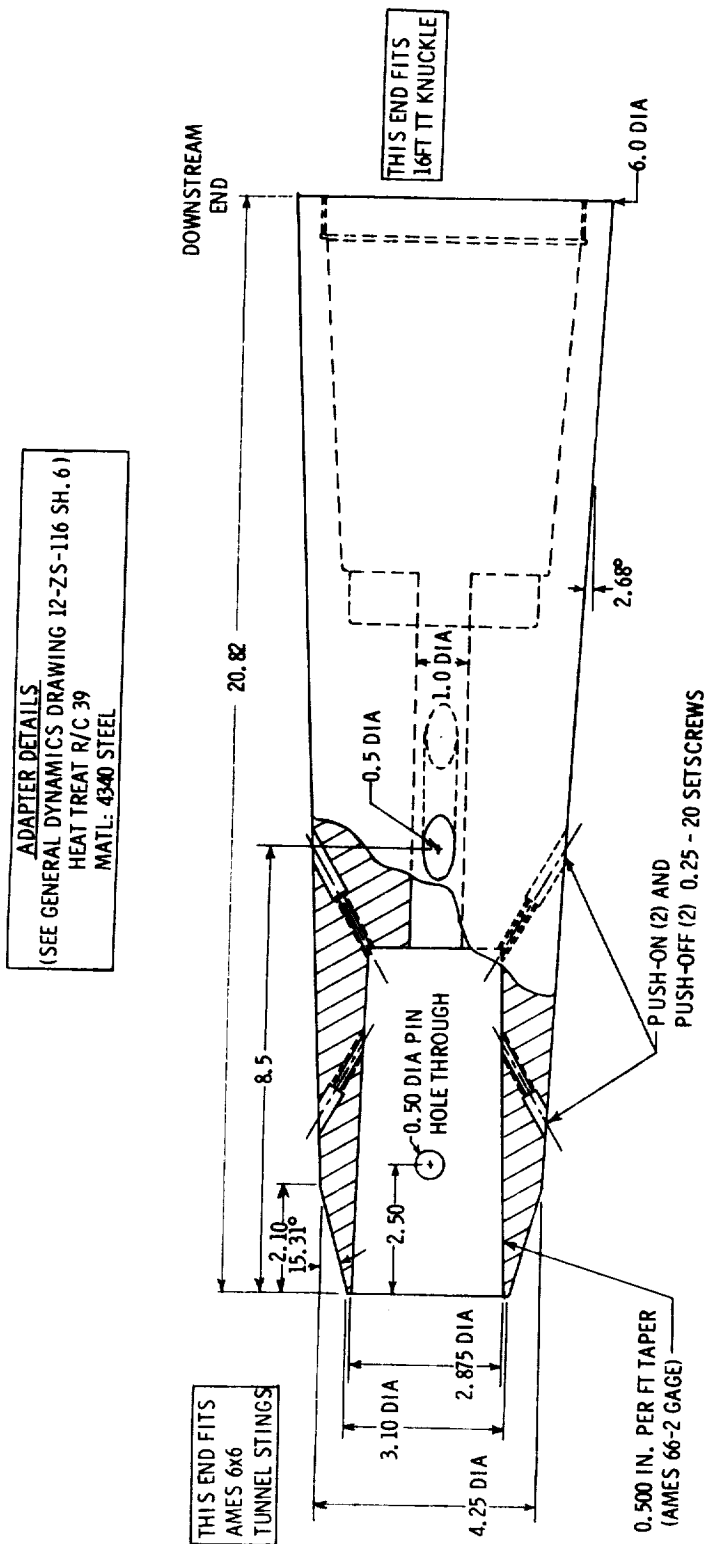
Sketch of adapter 12-ZS-116 SH.6. (All dimensions are in inches unless otherwise indicated.)
